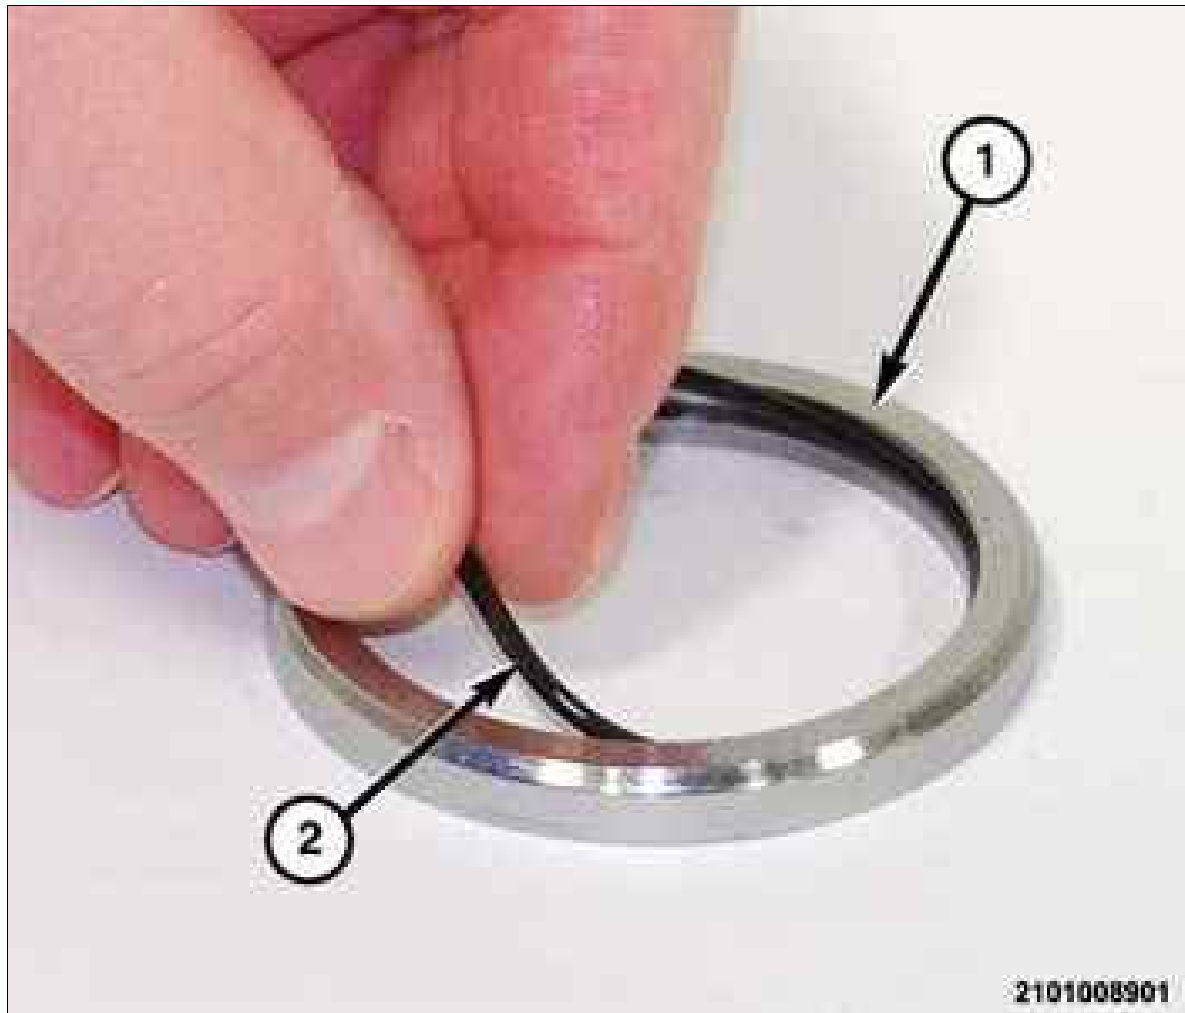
Installing New Outer O-Ring Seal Into The Dog F-Clutch Piston
